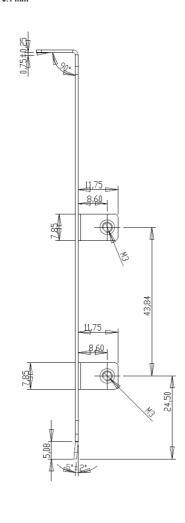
Dimensions Front Panel CIFX 50-DN or CIFX 50E-DN
